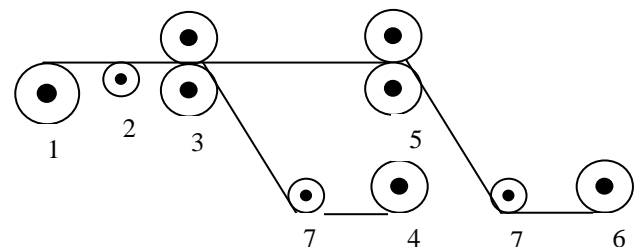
Description for Structure of Cylinder Hob Paper Cutting Machine
